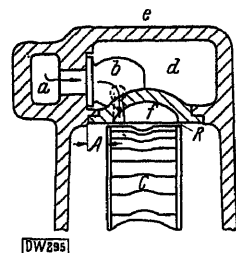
Radial (R) and axial (A) clearances between rotor and casing of a *Terry* turbine
